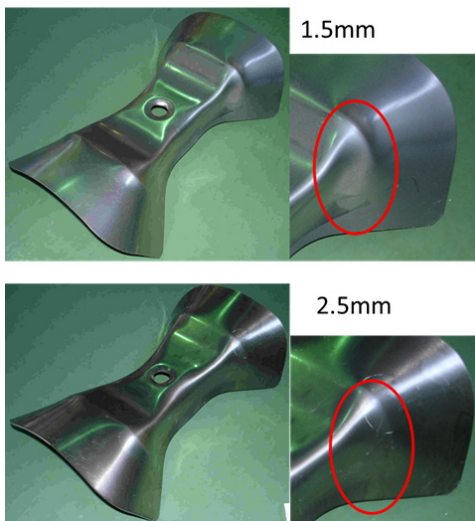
Press forming of aluminum plates of 1.5 mm and 2.5 mm thick.
